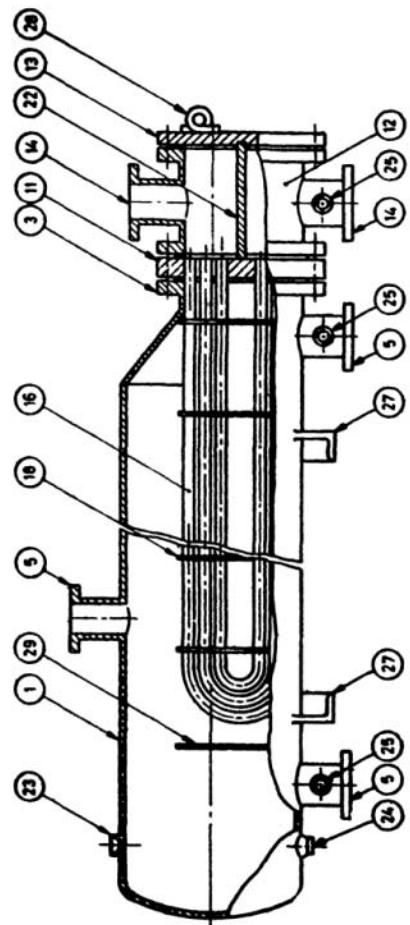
U-TUBE REBOILER OR KETTLE TYPE HEAT EXCHANGER
